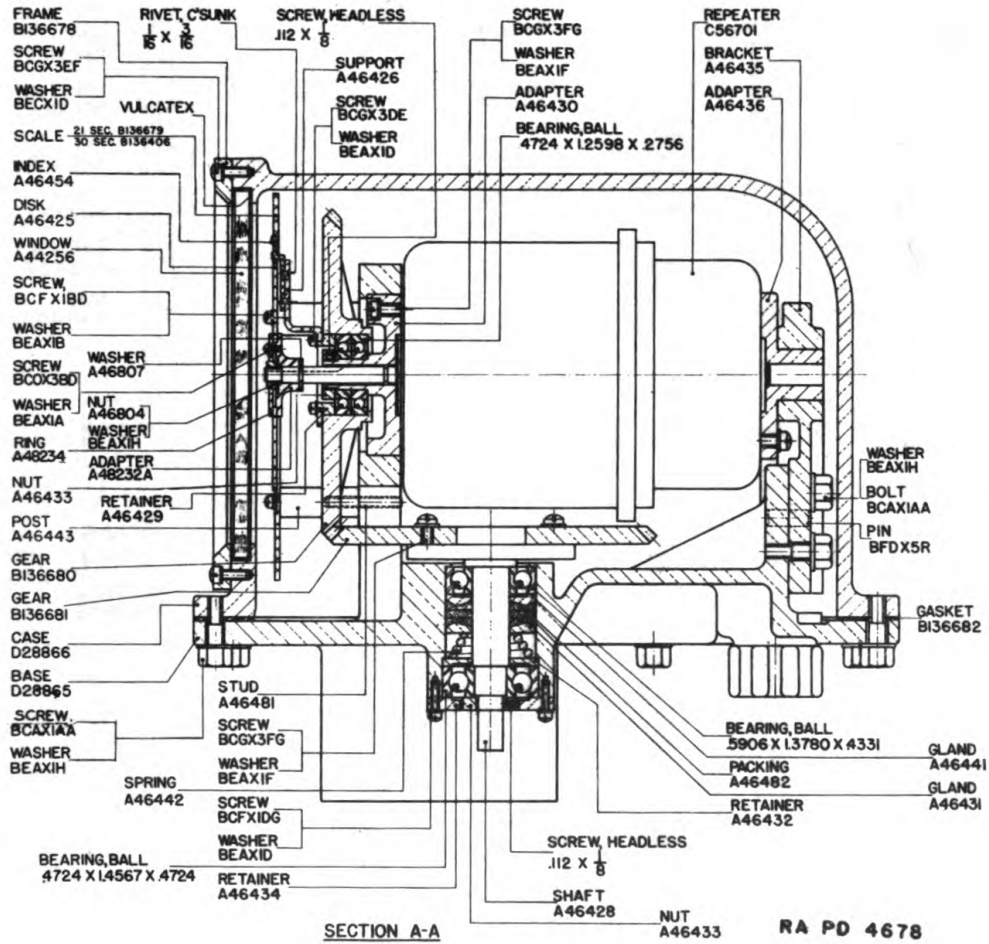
FUZE INDICATOR, M3 - SECTION A-A
